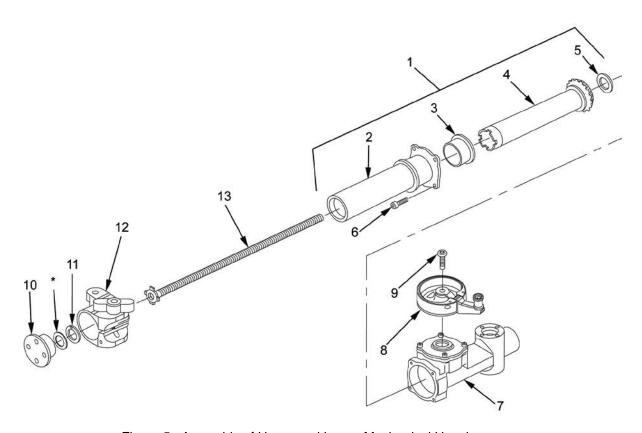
Assembly of Upper and Lower Mechanical Housings.
